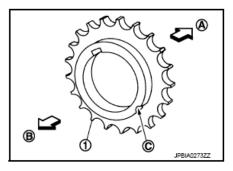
Identifying Crankshaft Sprocket And Matching Mark Courtesy of NISSAN NORTH AMERICA, INC.
